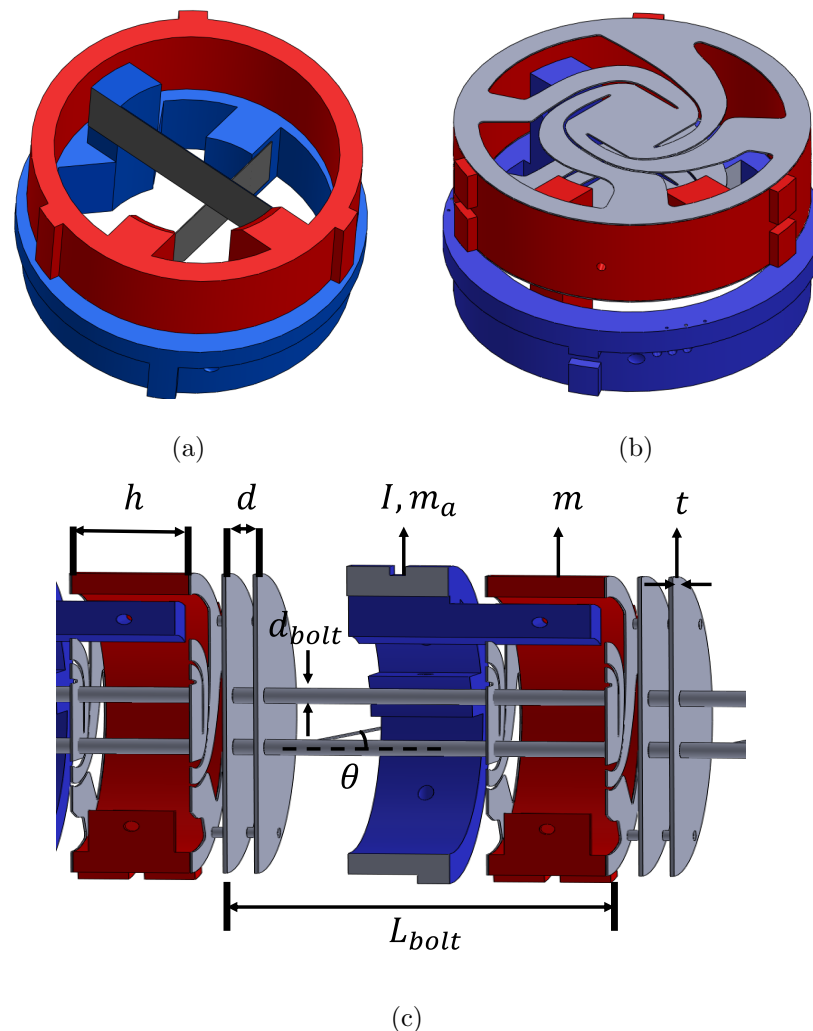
Separated Parts of the Unit Cell Mechanism and Integrated Final Design
